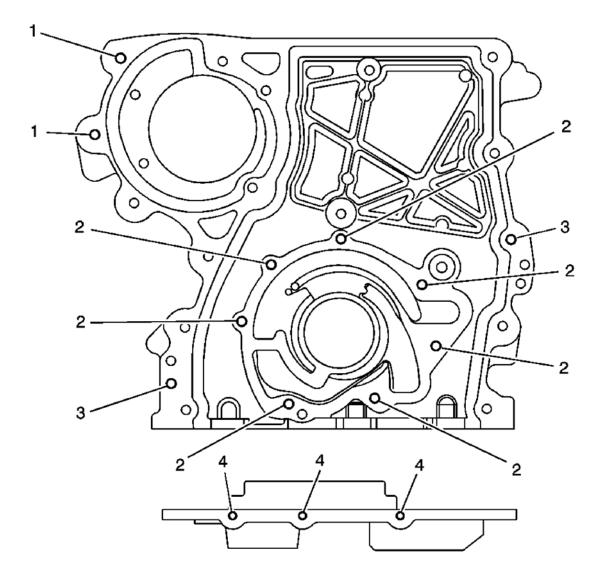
Engine Front Cover Thread Repair Courtesy of GENERAL MOTORS CORP.
